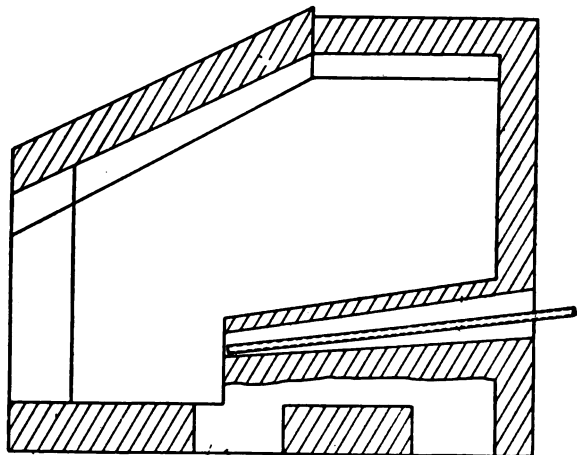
Oil burner in brick tunnel through end of open-hearth furnace.
